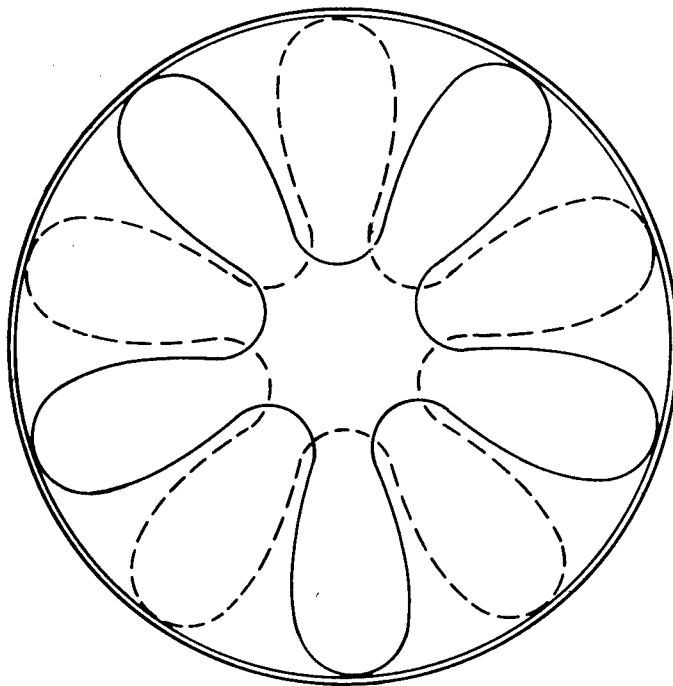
FIXTURE FOR FABRICATION OF INTERNAL FINS (DESIGN A)
